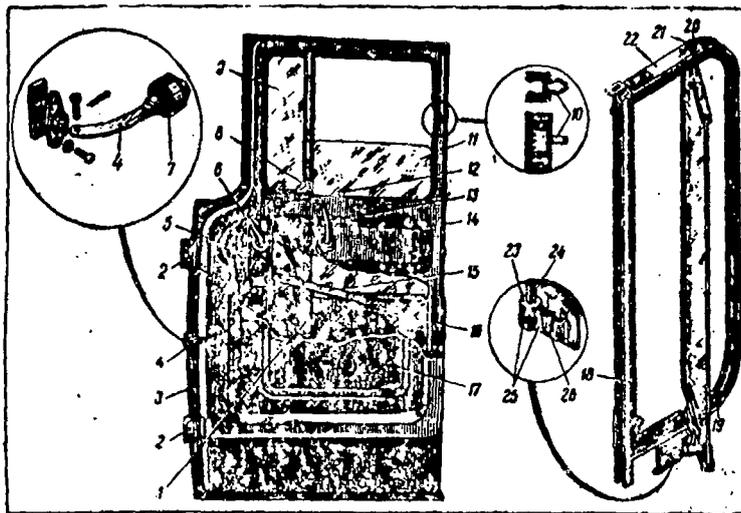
Right Door of ZIL-130 and ZIL-131 Cabin: 1, roll-up window guide; 2, door hinge; 3, door seal; 4, door limiter; 5, glass lifter; 6, window crank; 7, limiter buffer; 8, vent wing catch; 9, vent wing; 10, seal mounting pins; 11, roll-up window; 12, plug; 13, inside door handle; 14, cover; 15, window lifting arm; 16, crosspiece; 17, hatch cover; 18 and 19, vent wing seals; 20, vent wing glass frame; 21, upper axis of vent wing; 22, vent wing seal frame; 23, bushing of axis; 24, lower vent wing axis; 25, clamp; 26, retaining screw
